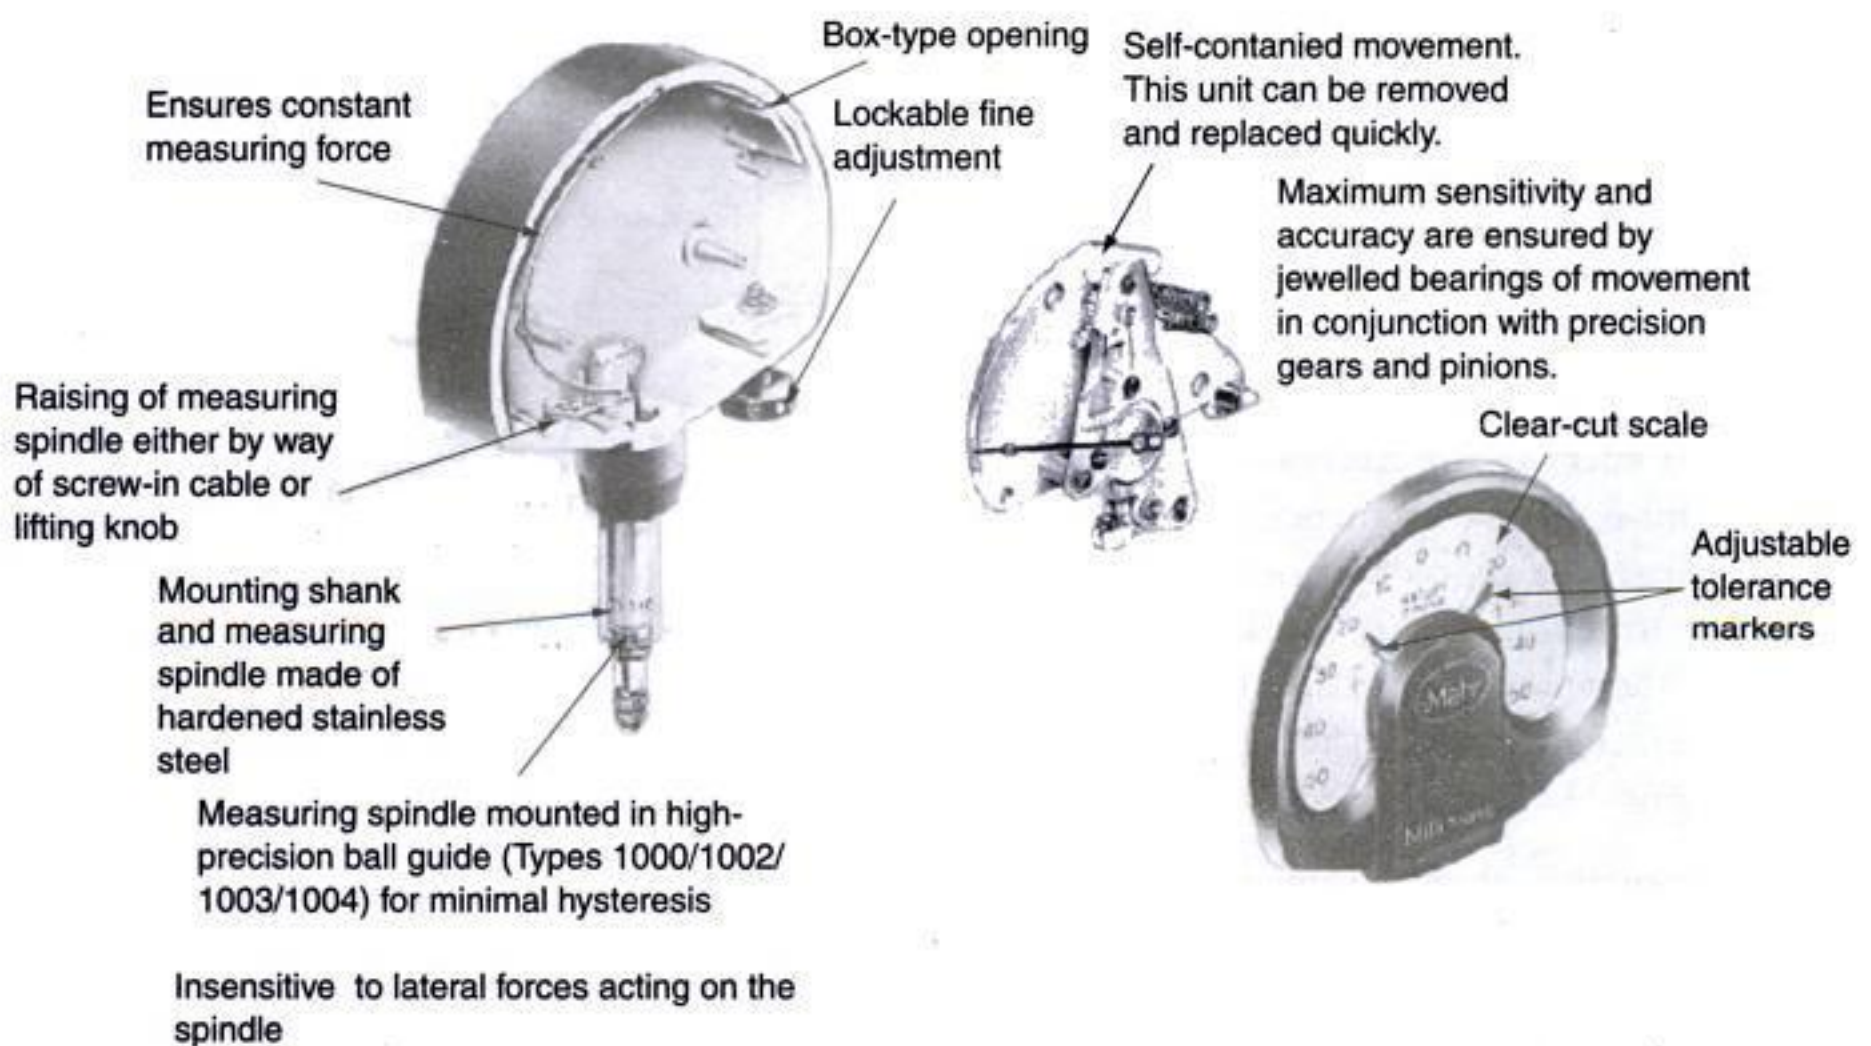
Exploded view of mechanical dial comparator with limit contacts
